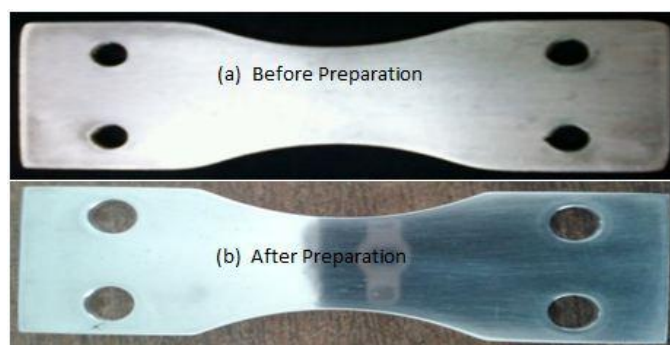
Standard Fatigue Test Specimen Before (a) and After (b) Preparation Steps.
